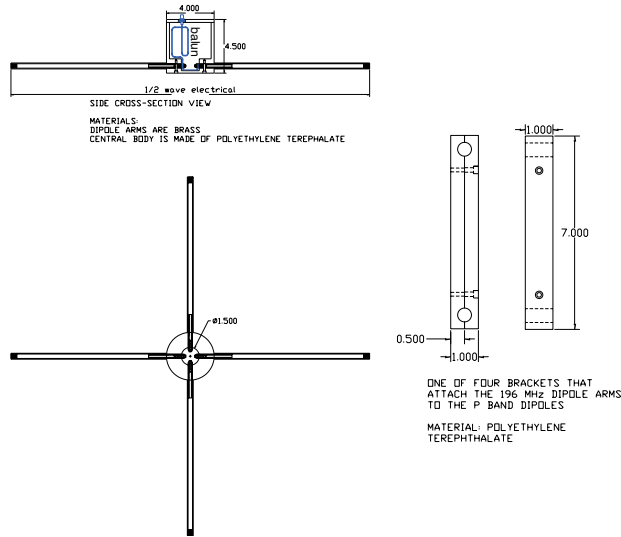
Layout for a dipole assembly to be attached to an existing 320 MHz assembly via spacer blocks that slide over the dipole arms and are held in place by set screws (right). The separation is ~ 16 cm. This is the preferred deployment option, subject to evaluation of field tests.
